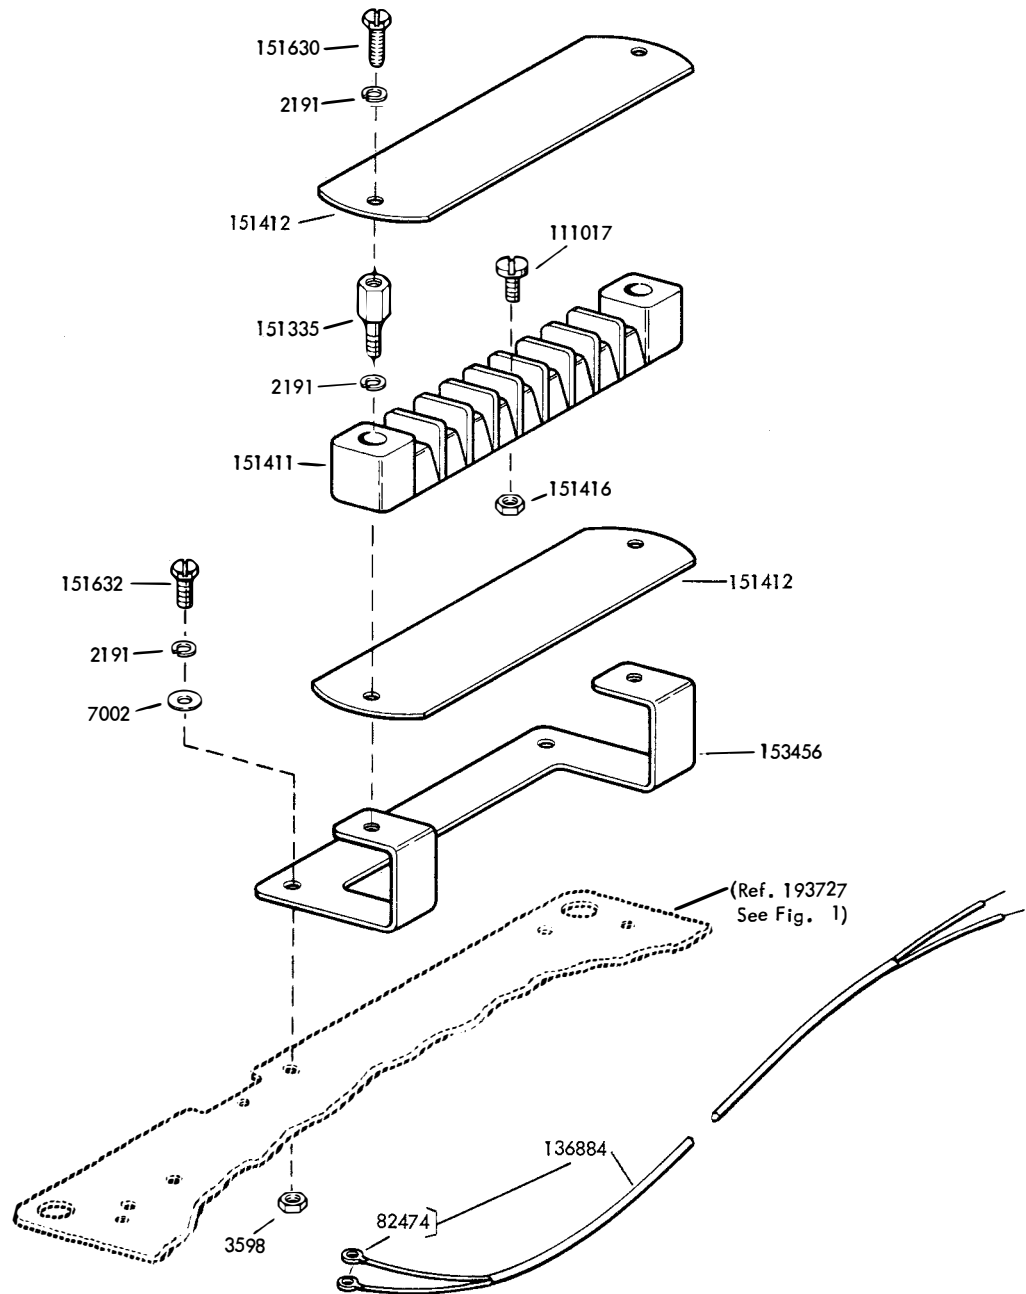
TERMINAL BLOCK AND BRACKET MOUNTING
